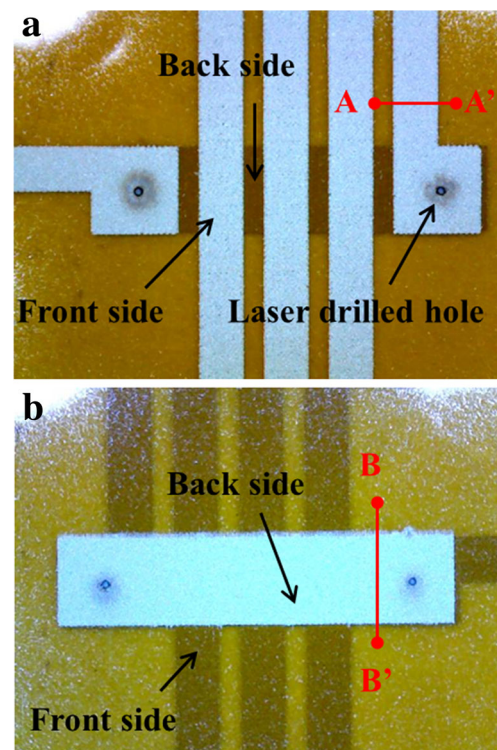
Measurement of double-side printed patterns: images of a front side and b back side with laser-drilled holes on the terminals
